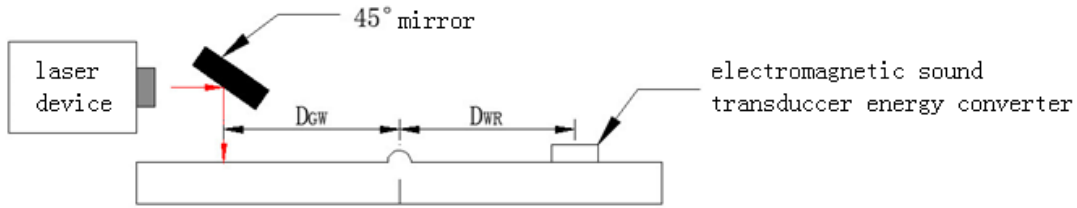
Experimental setup to measure weld penetration depth with RGLS TOF method
